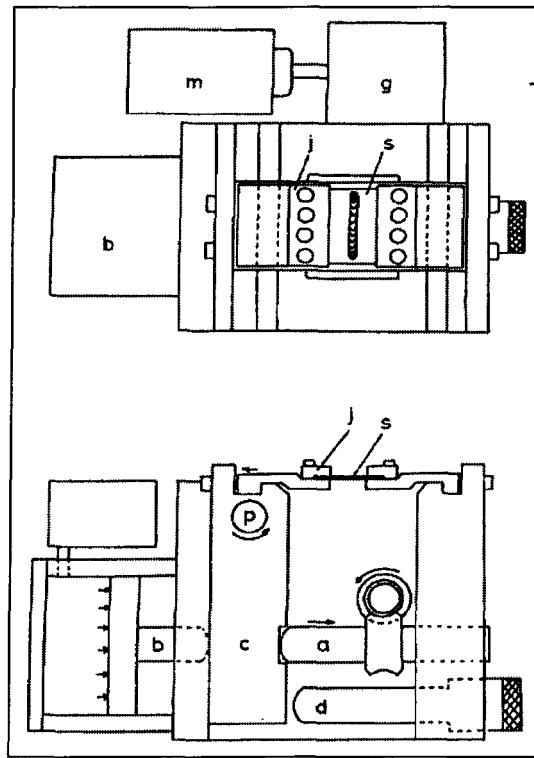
The tensile strain apparatus of hot tearing test in welding [69].
